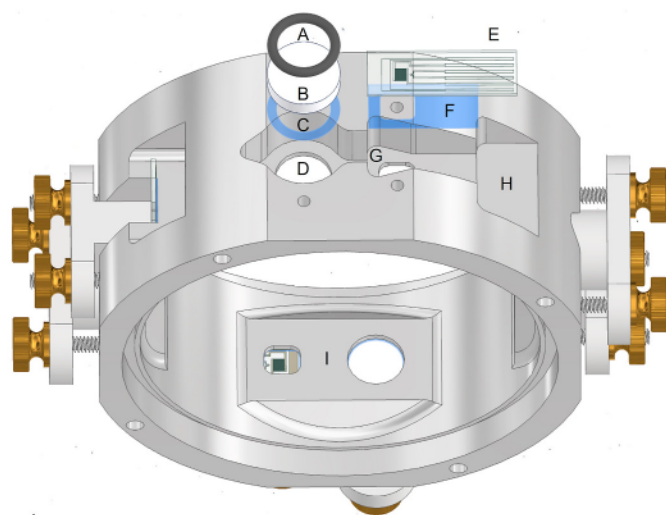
CAD rendering of machined 6061 aluminum coupon ring with integrated sensors and biofilm coupons. The coupon/sensor integration assemblies are composed of A) O-ring to accommodate different coupon thicknesses, B) biofilm coupon, C) silicone gasket for a watertight seal with the biofilm coupon, D) biofilm coupon port, E) microfabricated sensor, F) silicone gasket for a watertight seal with the sensor, G) sensor port, H) card reader slot, and I) internal view of the sensor and biofilm coupon ports.
